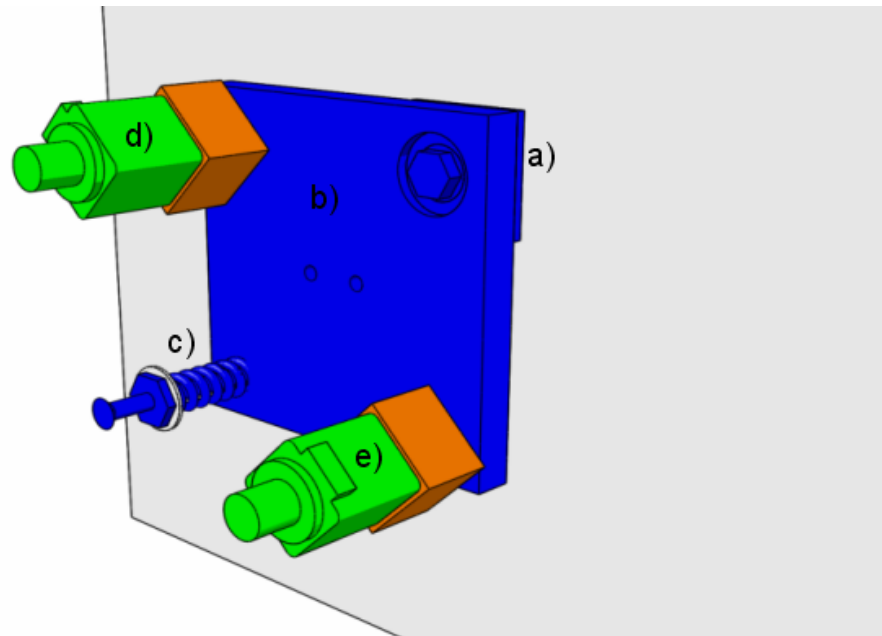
Spherical bearing mirror mount, showing a) spherical bearing, b) bracket plate, c) tensioning spring, d) and e) motorized adjusters.
